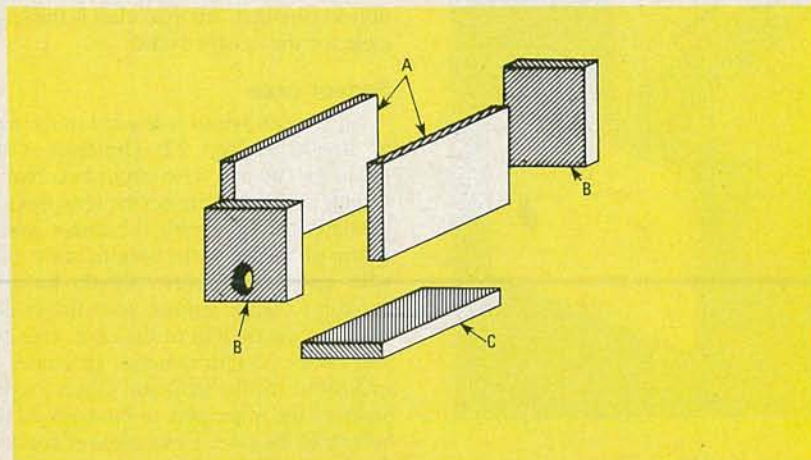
THE DIMENSIONS for the small sensor case shown here are given in Table 3. Be sure to drill a hole for the connecting cable.
